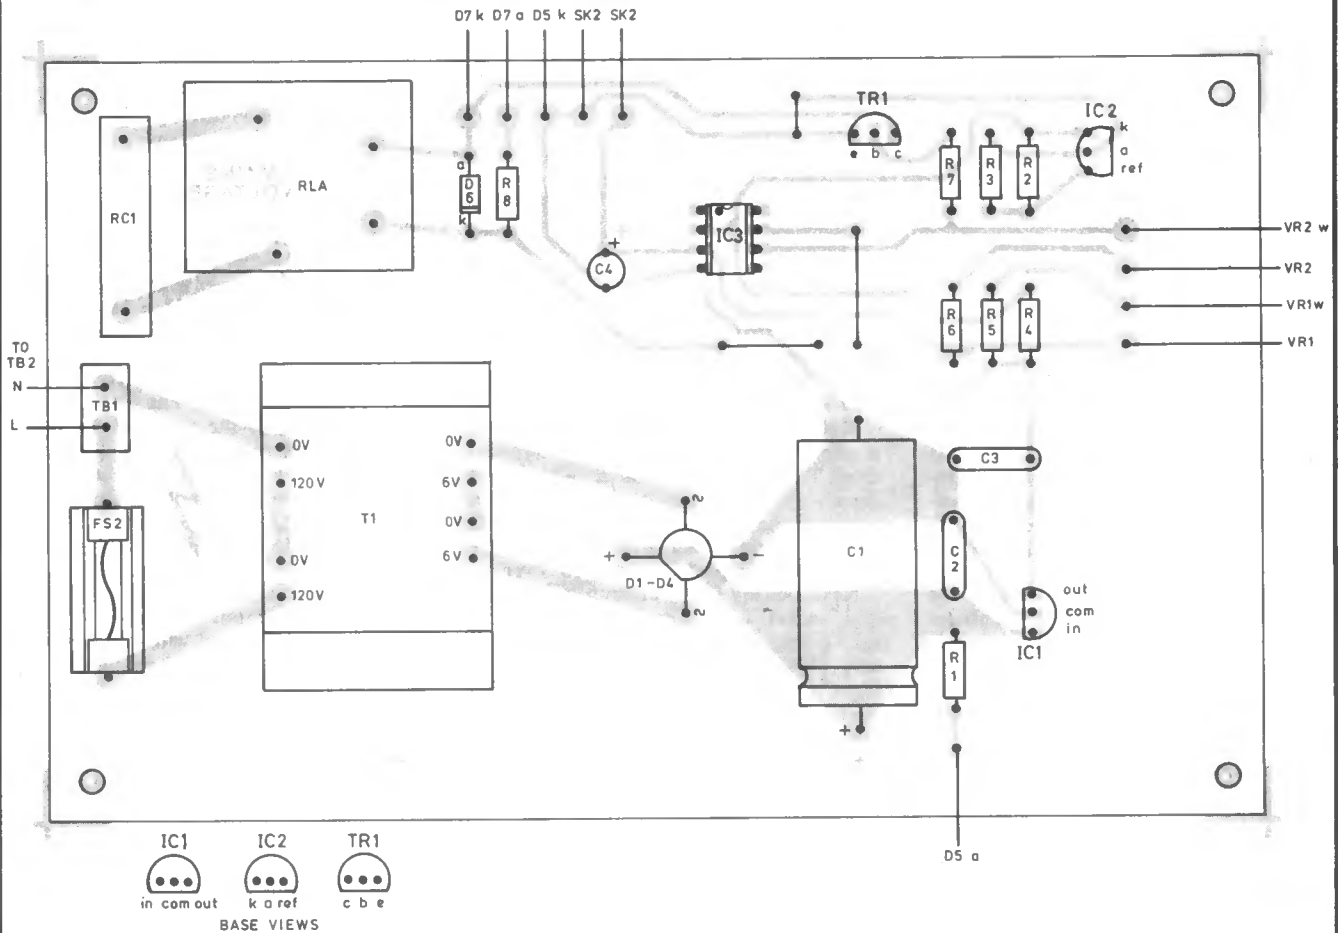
Thermostat printed circuit board component layout and full size underside copper foil master pattern. Also shown are the pinout details for IC1, IC2 and transistor TR1.
